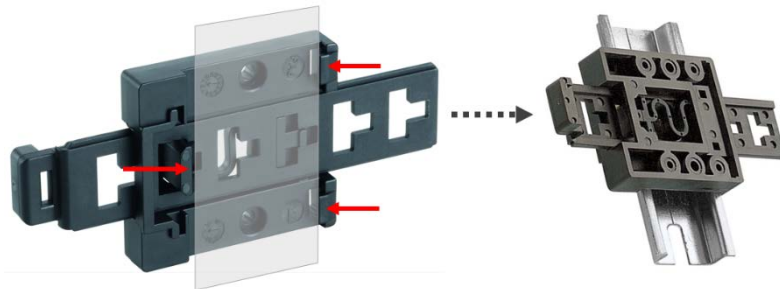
Mounting on a mounting rail – Attaching the mounting rail bracket to the mounting rail
